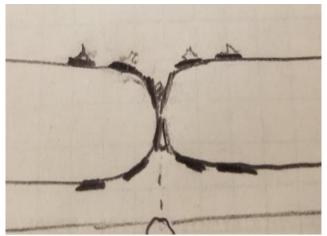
Sideview of how the tray conveyor would apply pressure to join two filled shell halves.
